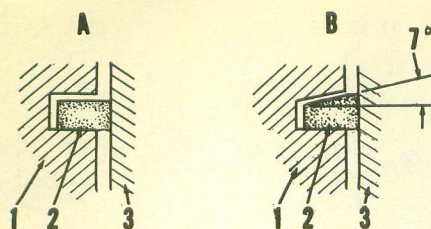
A—Keystone type piston and ring assemblies (B) are used on later models.
